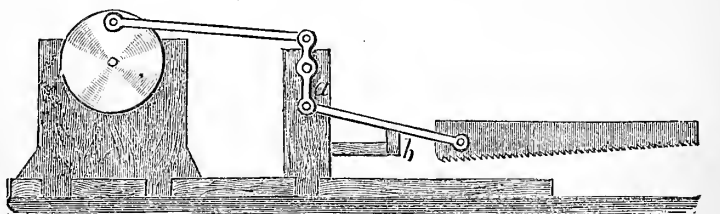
SHOWING CRANK AND LEVER ATTACHMENT.
